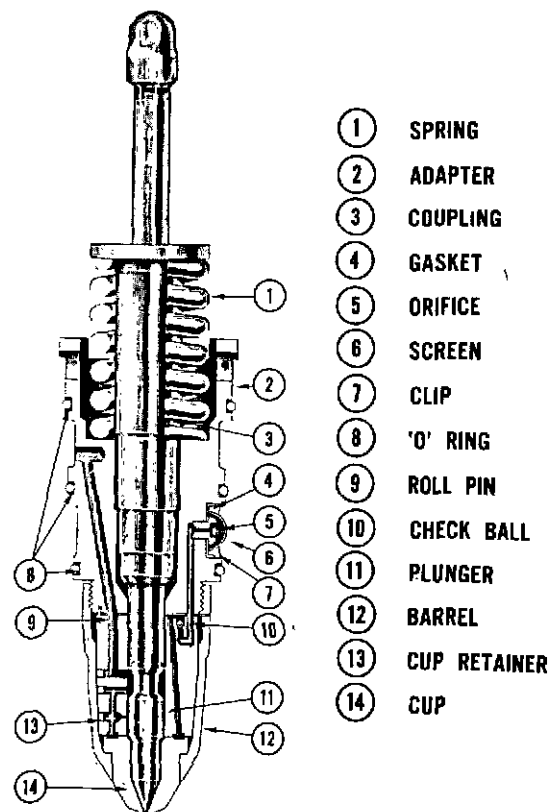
, FWC-27. Cross-section PT (type D) injector
